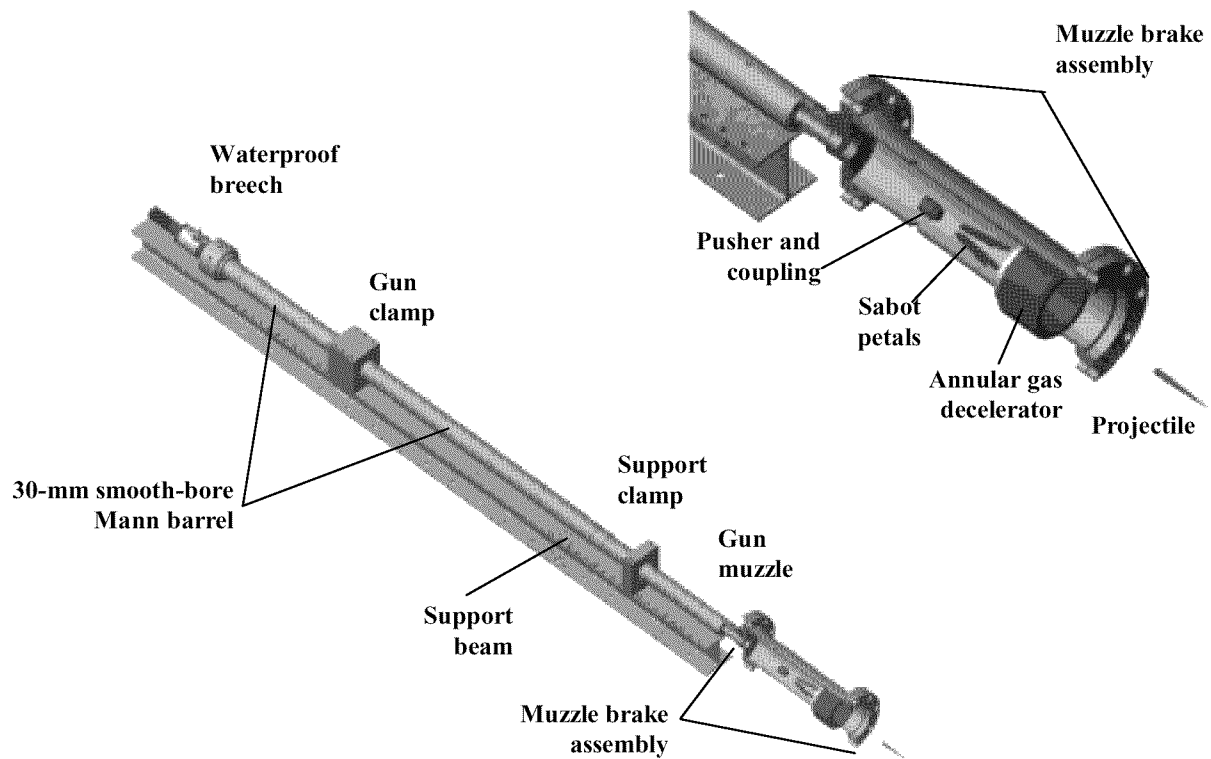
Schematic of 30-mm gun launcher and muzzle brake assembly
